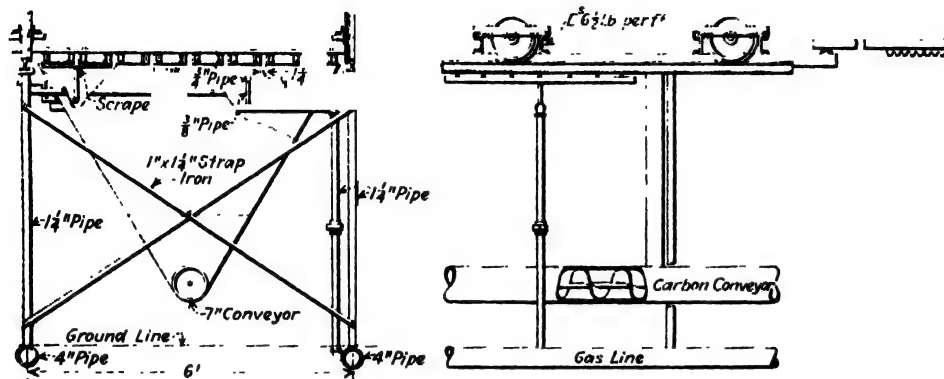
ASSEMBLY DRAWING OF TABLE OF CHANNELS
